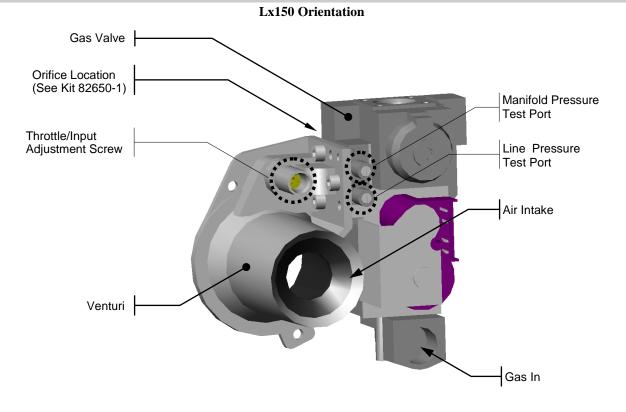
Lx150-300 Gas Valve and Venturi Assembly
